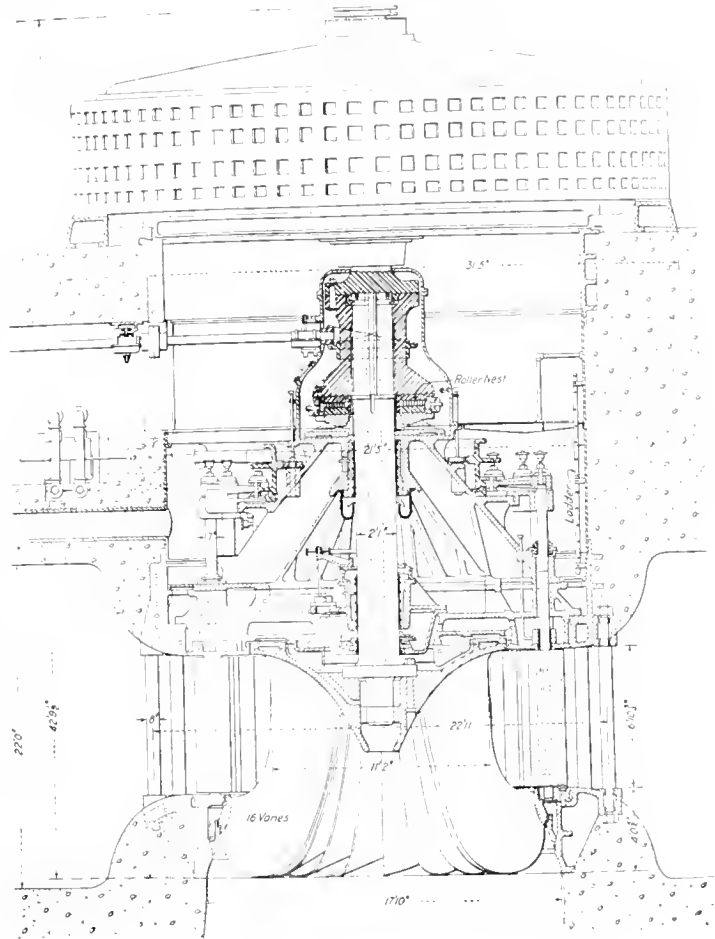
Sectional Elevation of Turbine Showing Thrust Bearing and Connection to Generator Shaft
